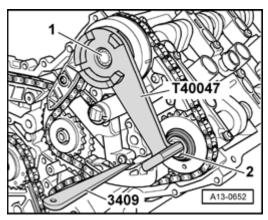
Securing Hall Sensor Wheel On Camshaft Adjuster Of Intake Camshaft Of Right Cylinder Head Using Setting Gauge T40047
